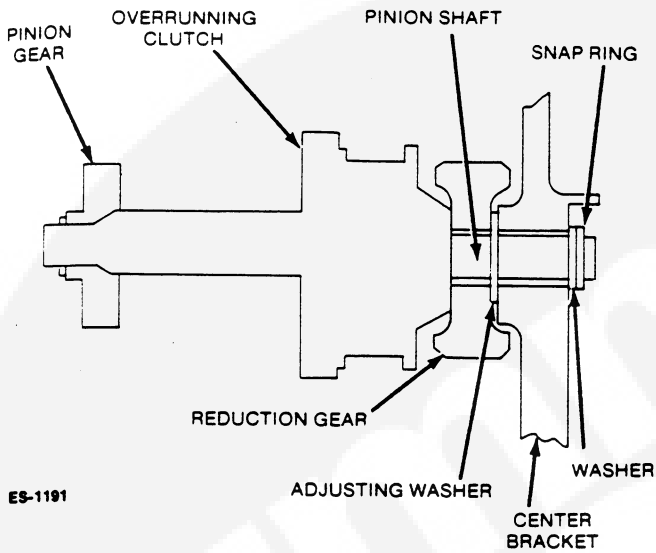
ADJUSTING PINION SHAFT END PLAY
